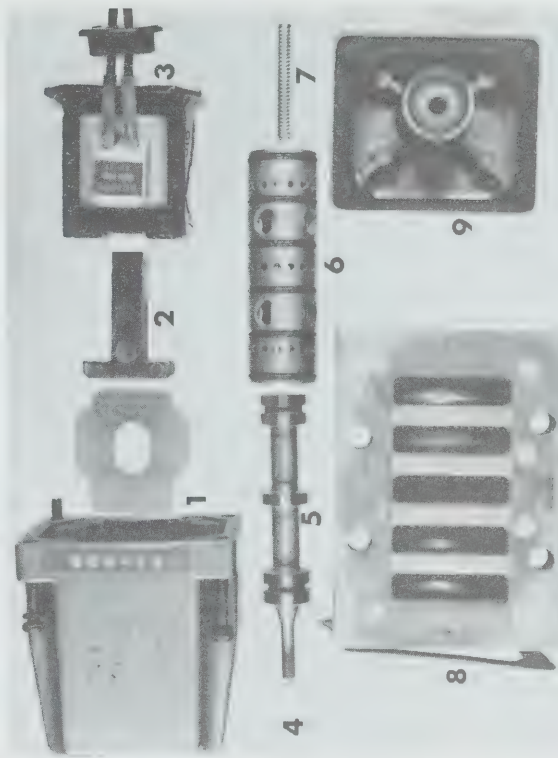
The various solenoid valve components: 1) front cover and gasket 2) solenoid core 3) solenoid 4) plastic keeper 5) spool 6) sleeve 7) spring 8) main valve body 9) back plate and gasket.
